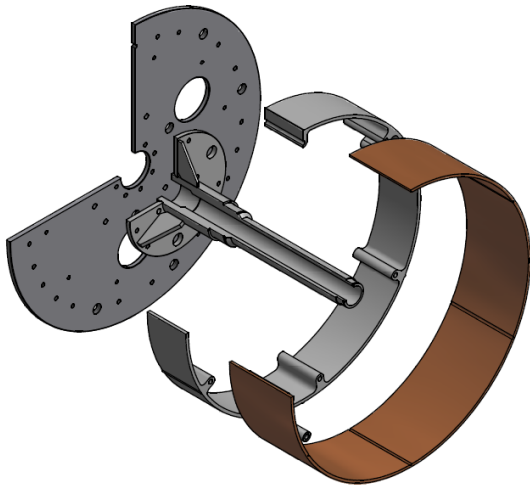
Cutaway diagram of the assembly of the prototype slip rotor components, including the shaft and back plate.
